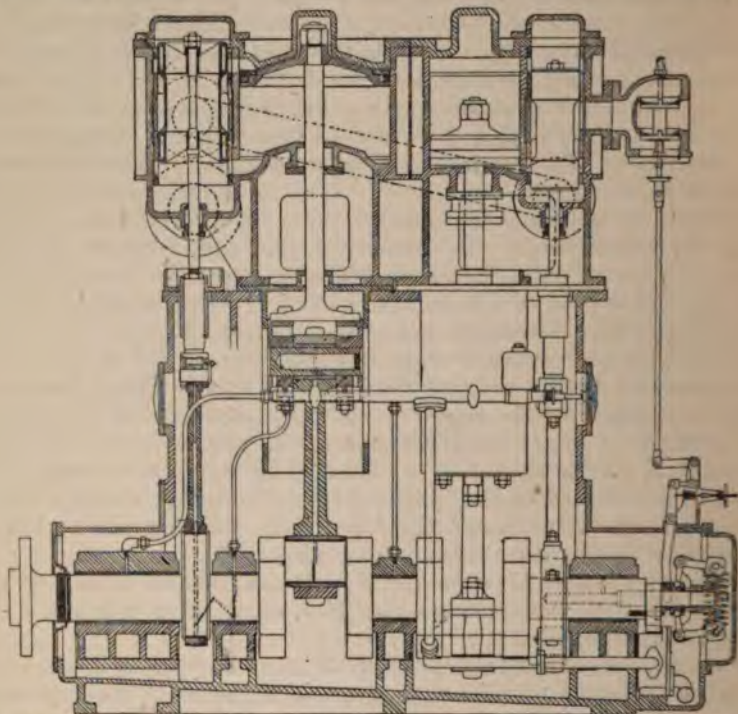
Longitudinal Section of Bumsted Double-acting Compound Enclosed Engine, with Shaft Governor.
